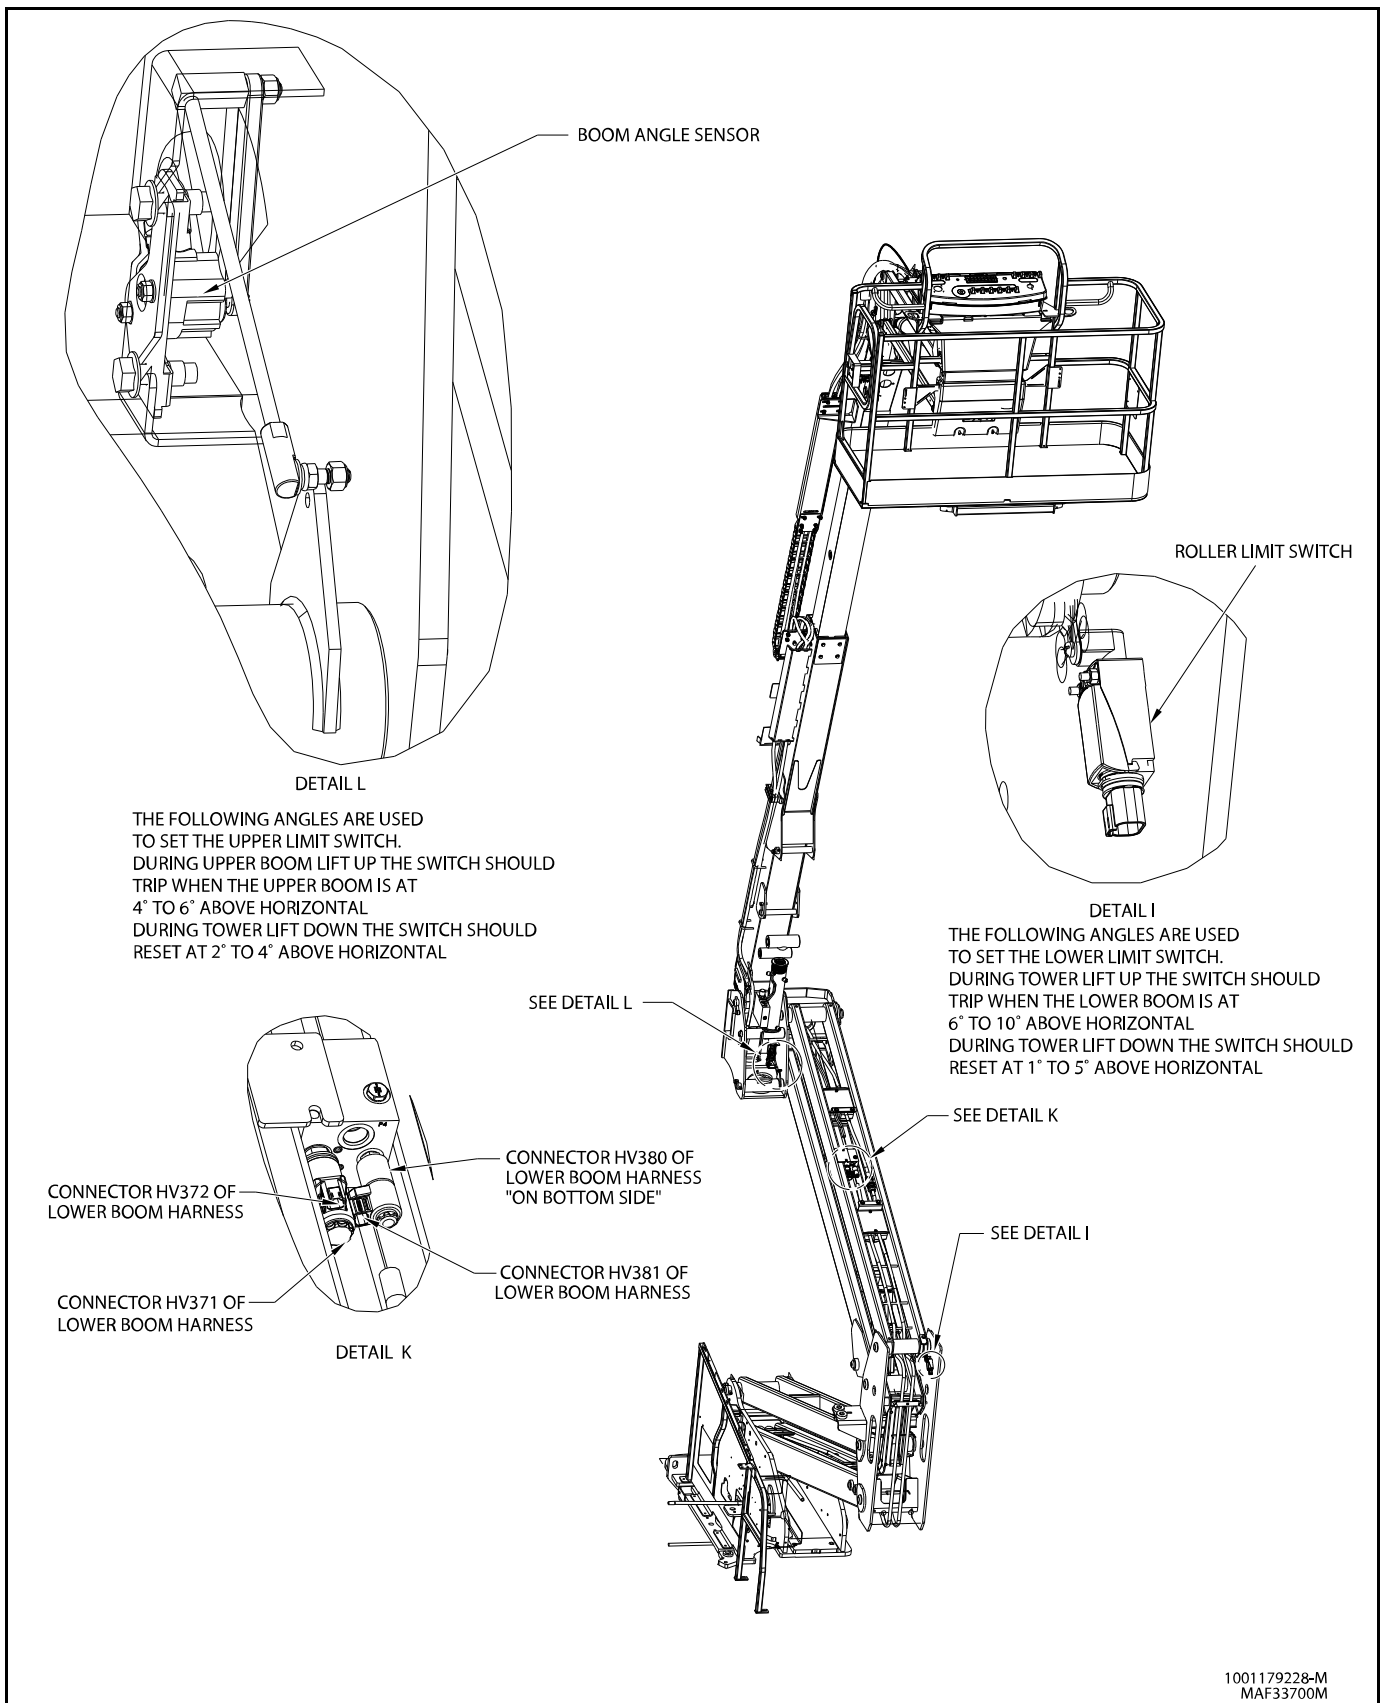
Cables and Clamps Installation - Sheet 3 of 8
